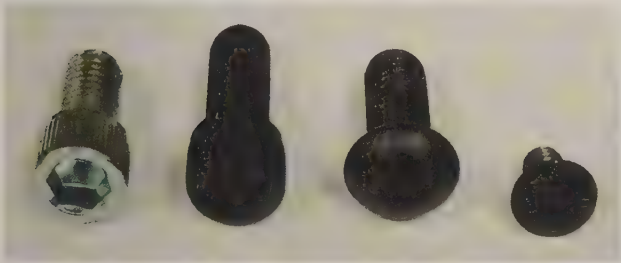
Various cap screws. From the left: a stainless-steel socket-head cap screw, a regular socket-head cap screw, a button-head cap screw, and a flat-head cap screw (Courtesy of Fox Valley Technical College).
